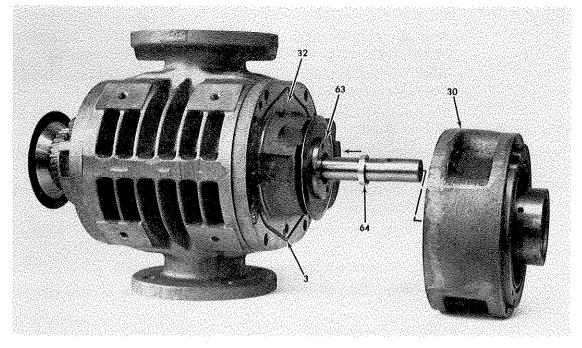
Installing the Oil Slinger and the Intermediate Flange (WA-250 pump model shown).
